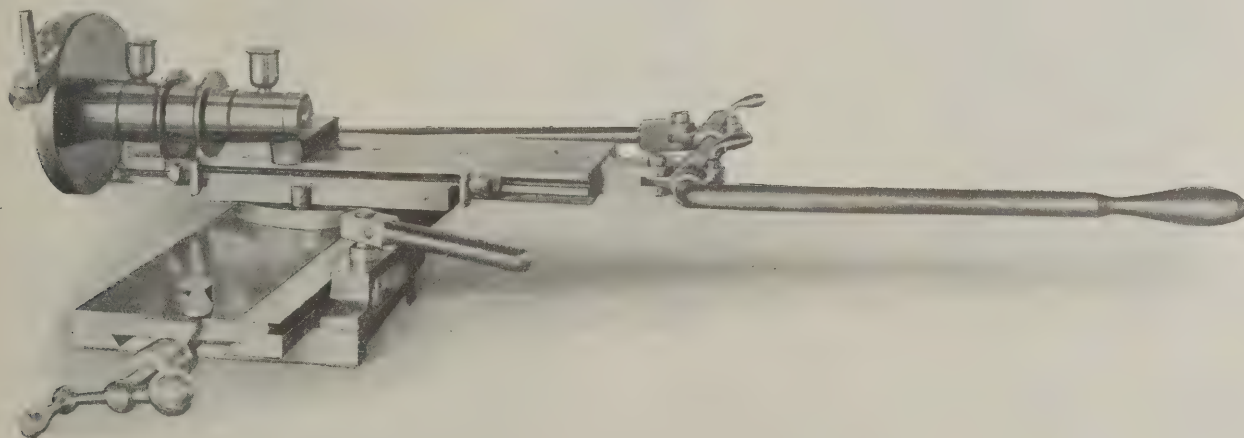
Remington External Grinding Attachment for Bench Lathes
